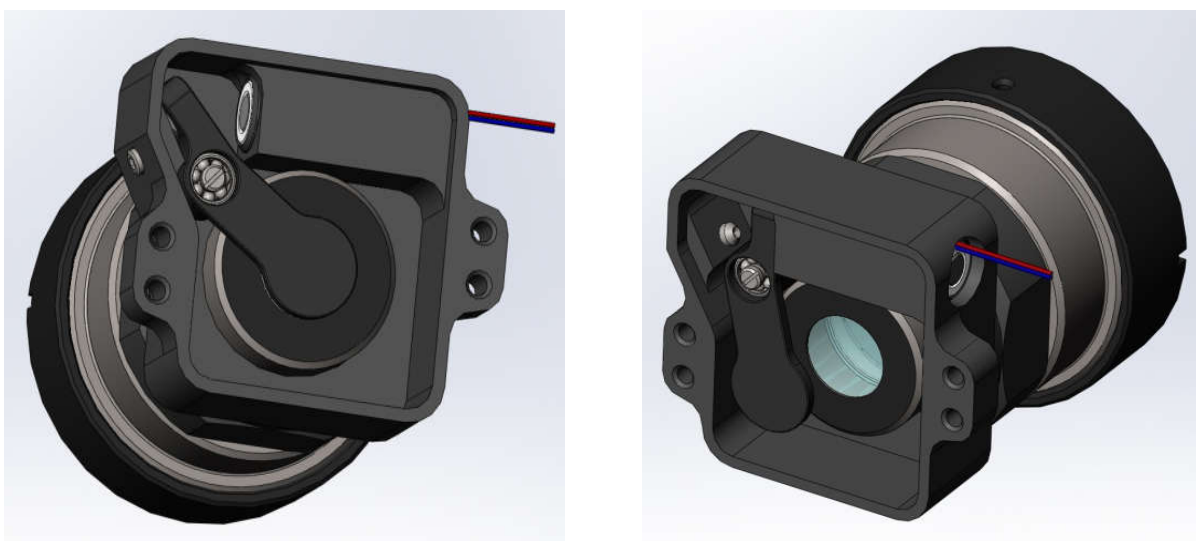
The upper part of the star tracker body consisting of a lens-holder with a calibration shutter, a lens and a lens hood.
